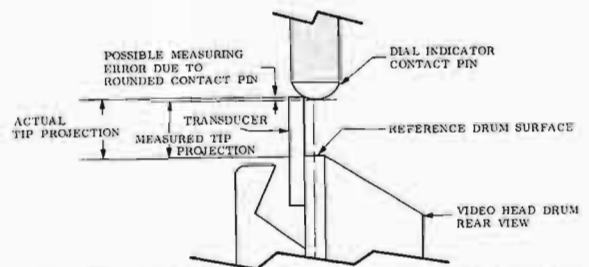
Dial indicator improper positioning, using rounded contact pin.
